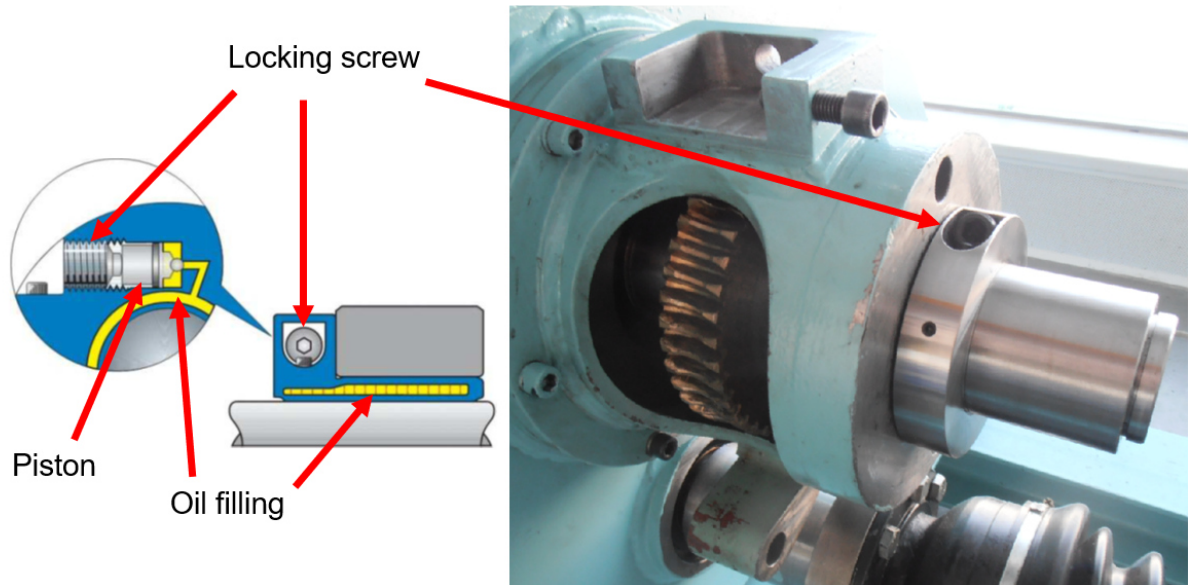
Principle and the appearance of the friction clutch ETP Techno on the CTU test stand [22].
